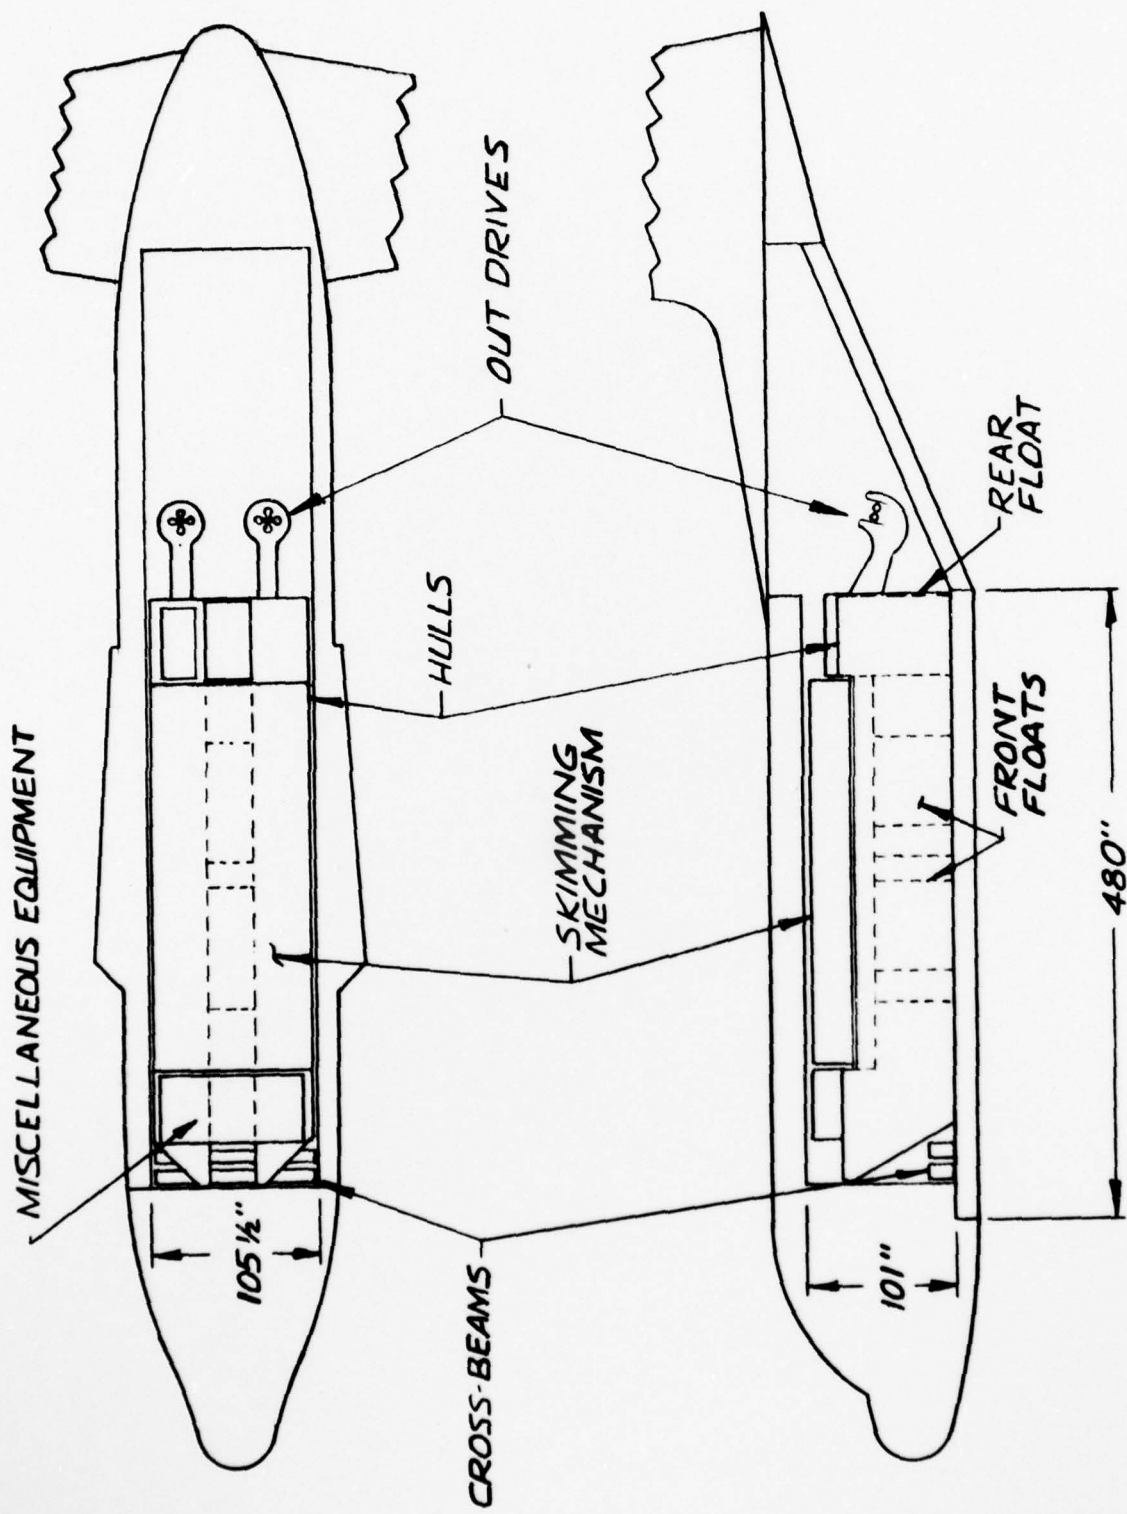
SKIMMER LOADED ON C-130 AIRCRAFT
